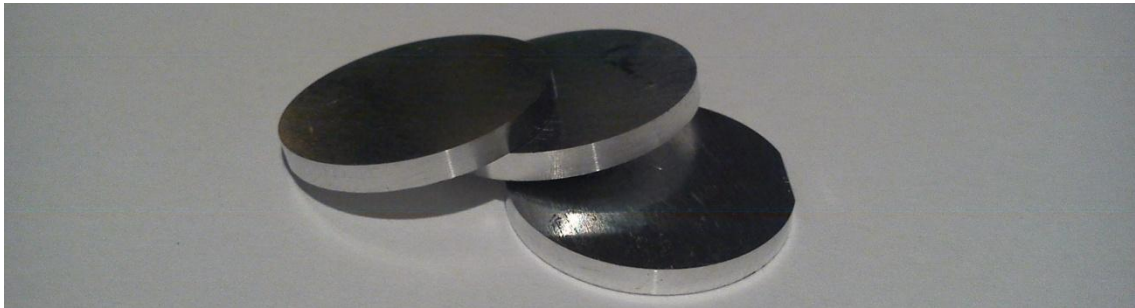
Disc samples like these are cut and machined from cold roll bonded sheets as the one in Figure 21.
